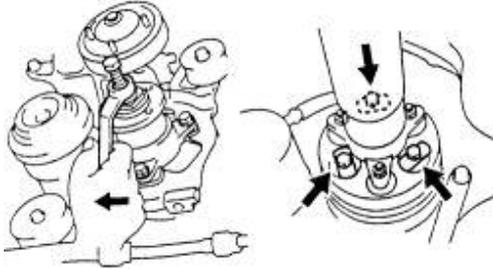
Rotate the shaft using the service nut enough to tighten each one of the bolts
